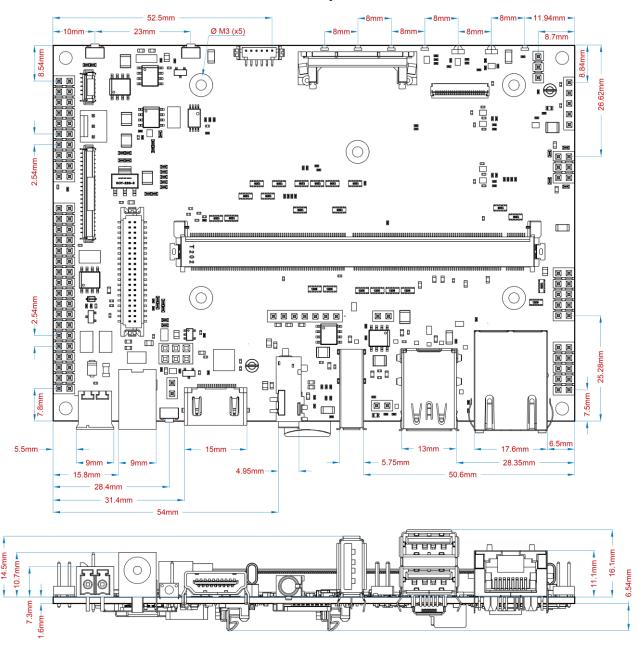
Ixora Carrier Board Mechanical Drawing - Top Side (All dimensions in millimeter)
